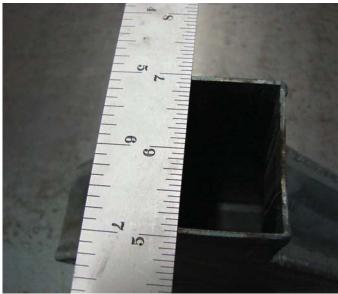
Measure the outside distance across the spout of the vase. This distance was left out of the parts list in Figure 7-1 so that the part length could be cut to fit.
